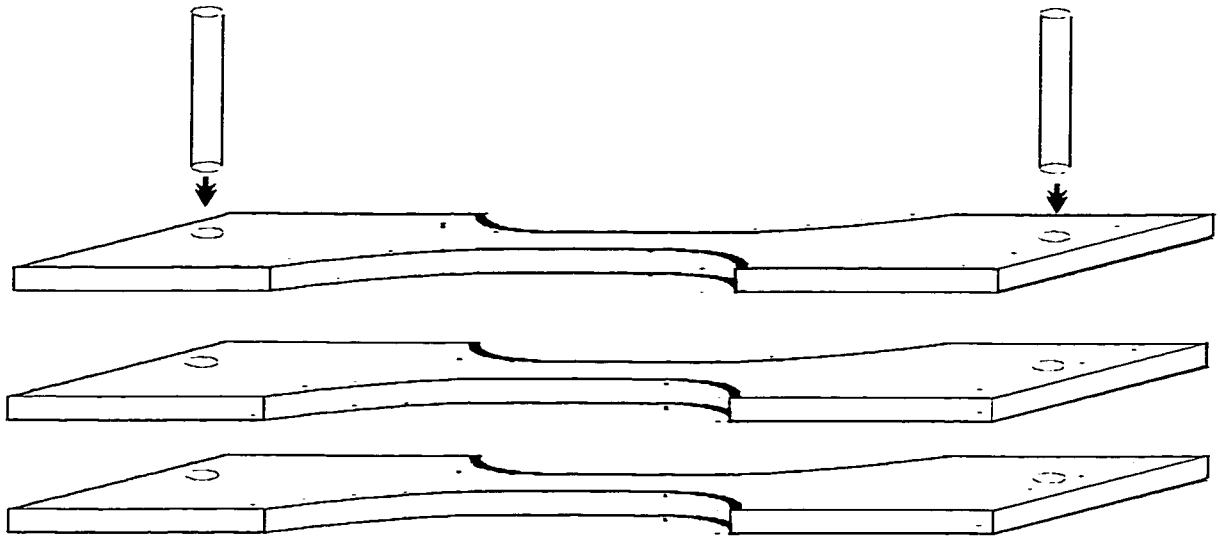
Schematic of the template used to cut the tensile micro-specimens.
